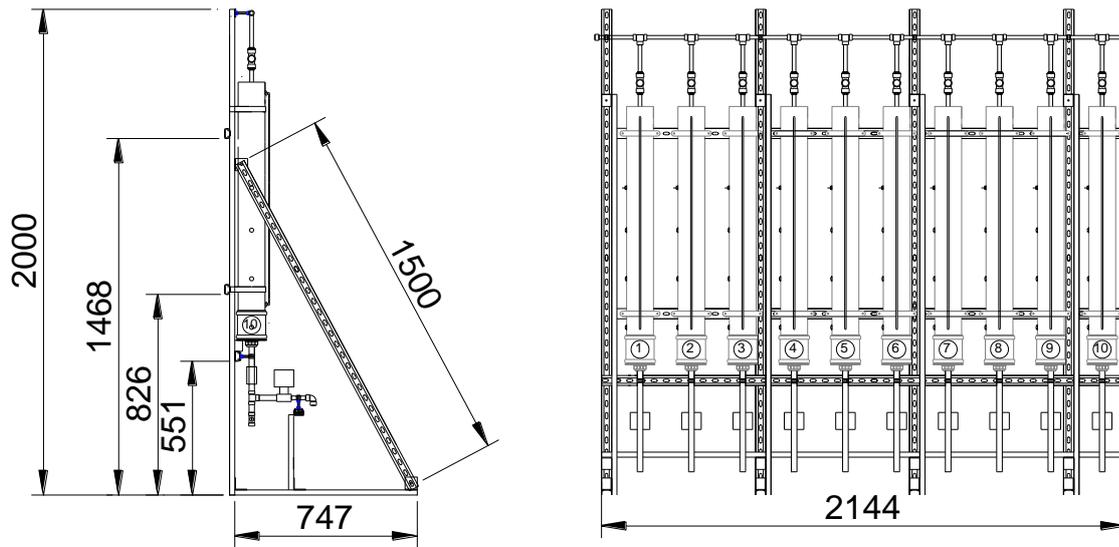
Dimensional and construction details of rig for 10 columns
